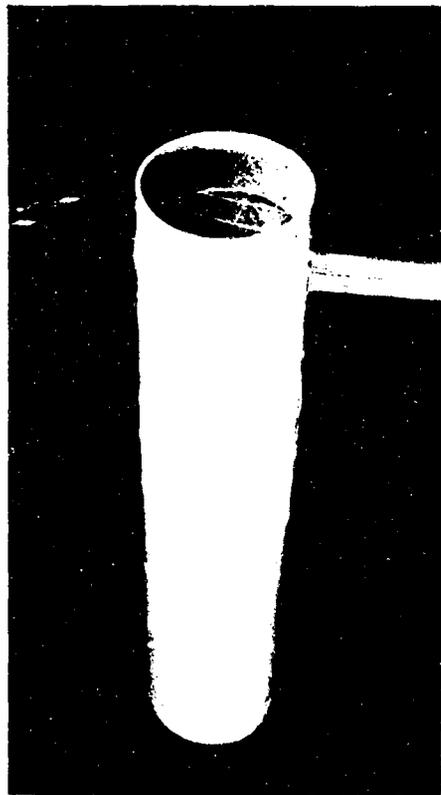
Cardboard mailing tube mold for explosive acceptor showing installation of grids before pouring.
